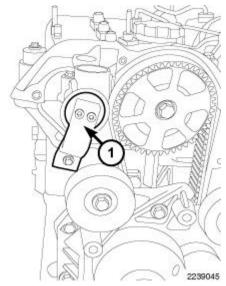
Camshaft Locking Tool Courtesy of CHRYSLER LLC
